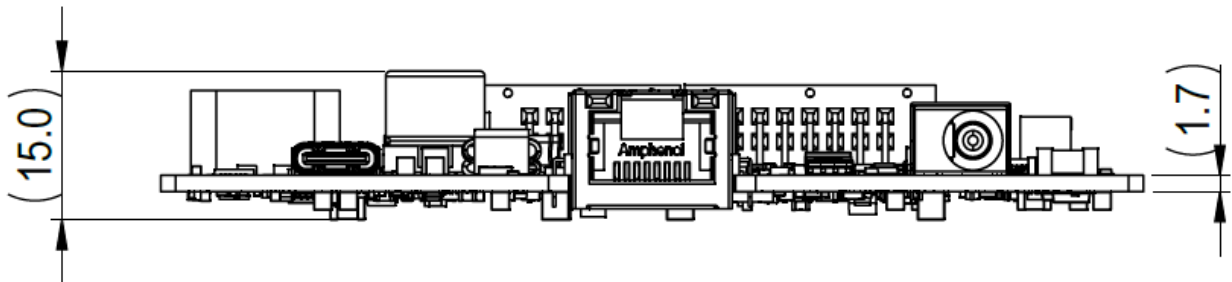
ICC-1C PCBA back view with the dimensions for the heights of the components
